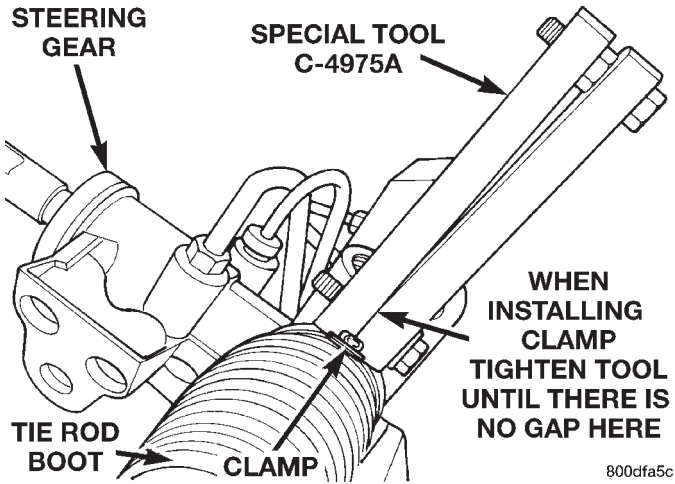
Installing Tie Rod Boot To Steering Gear Clamp
